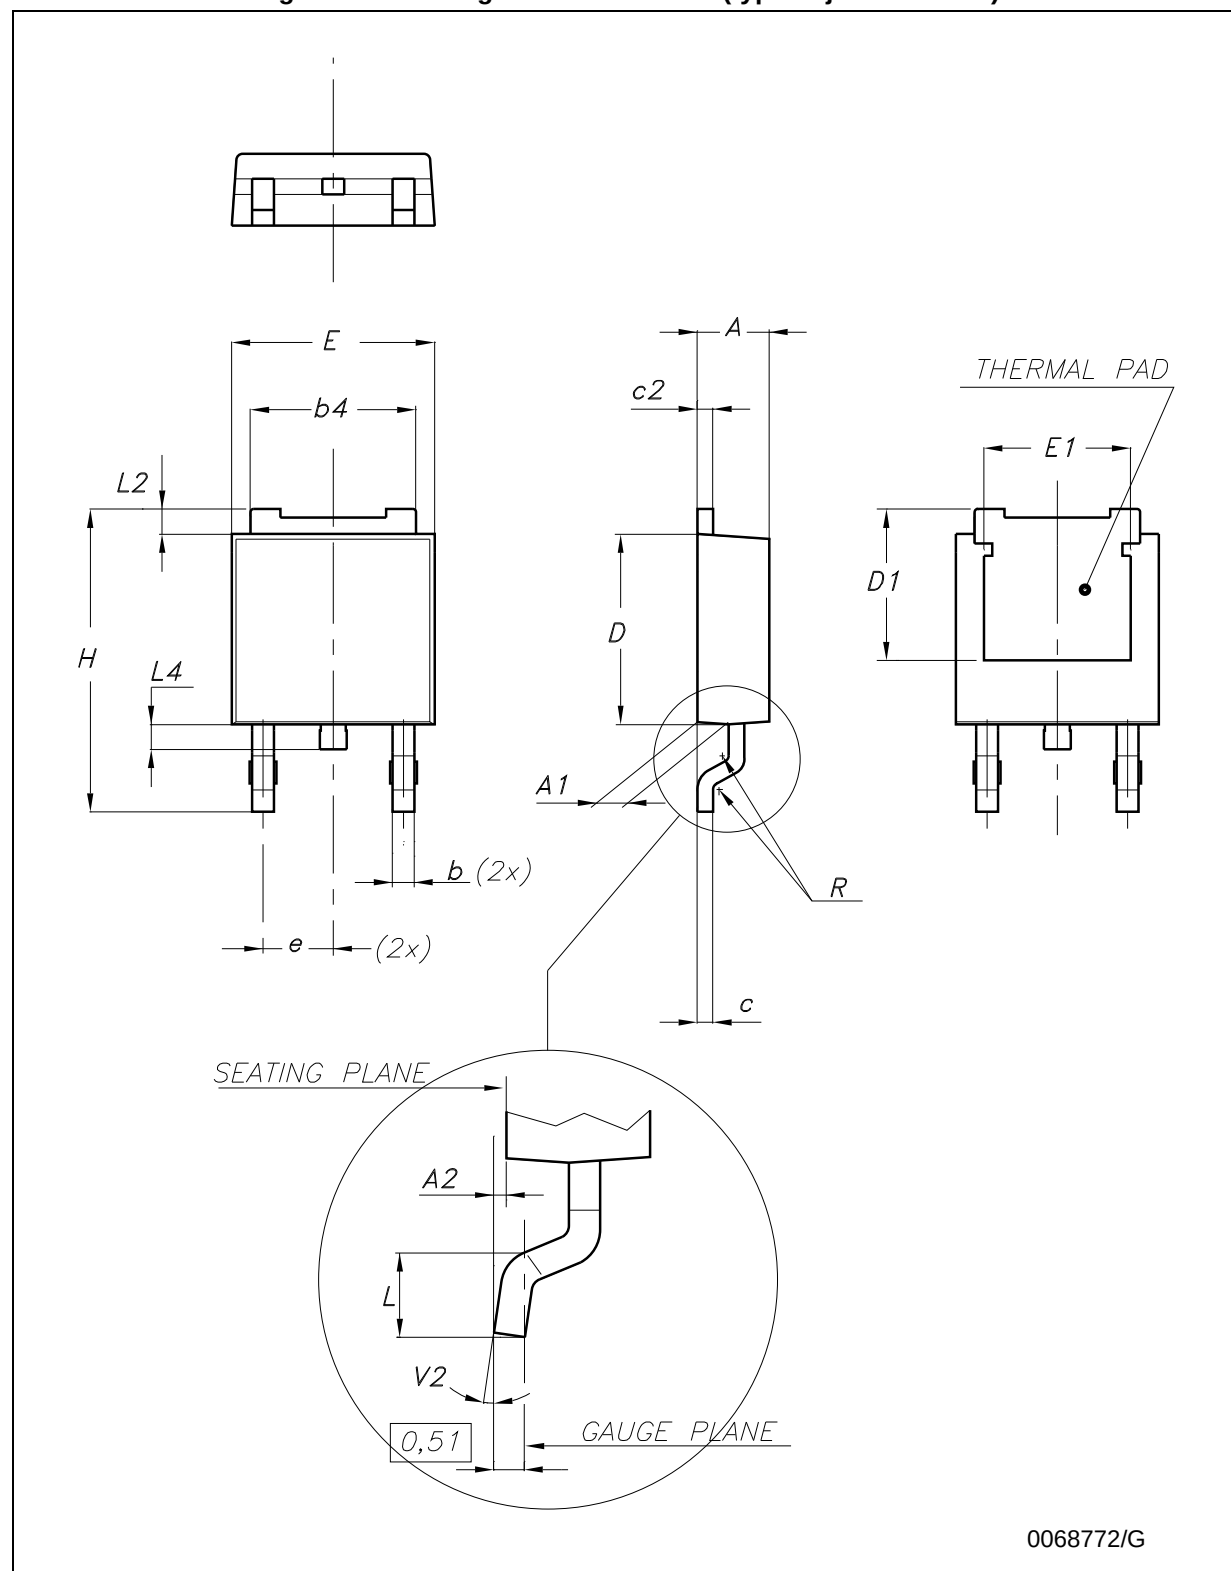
Drawing dimension DPAK (type IDS-subcon.)
